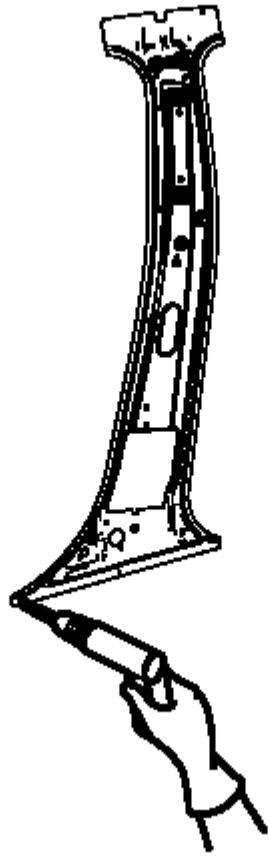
Drilling 8 Mm (5/16 In) For Plug Welding Along Edges Of Service Panel
